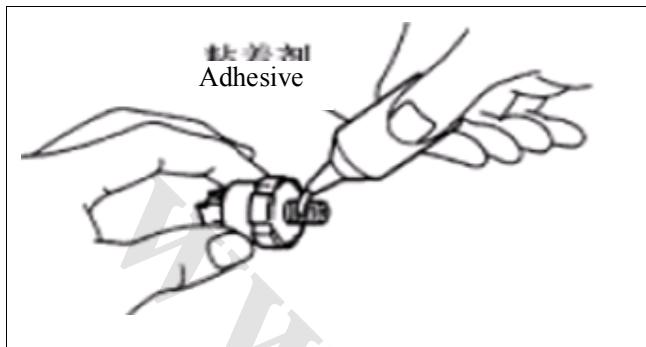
Anaerobic Pipe Thread Sealant
